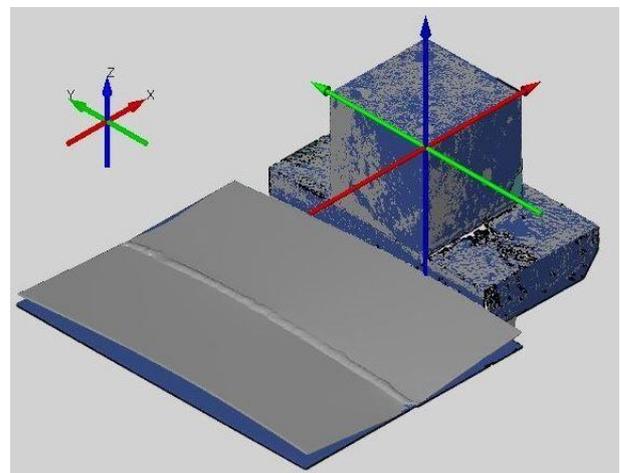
A scan of weldment and fixture with marked origin of co-ordinate system
